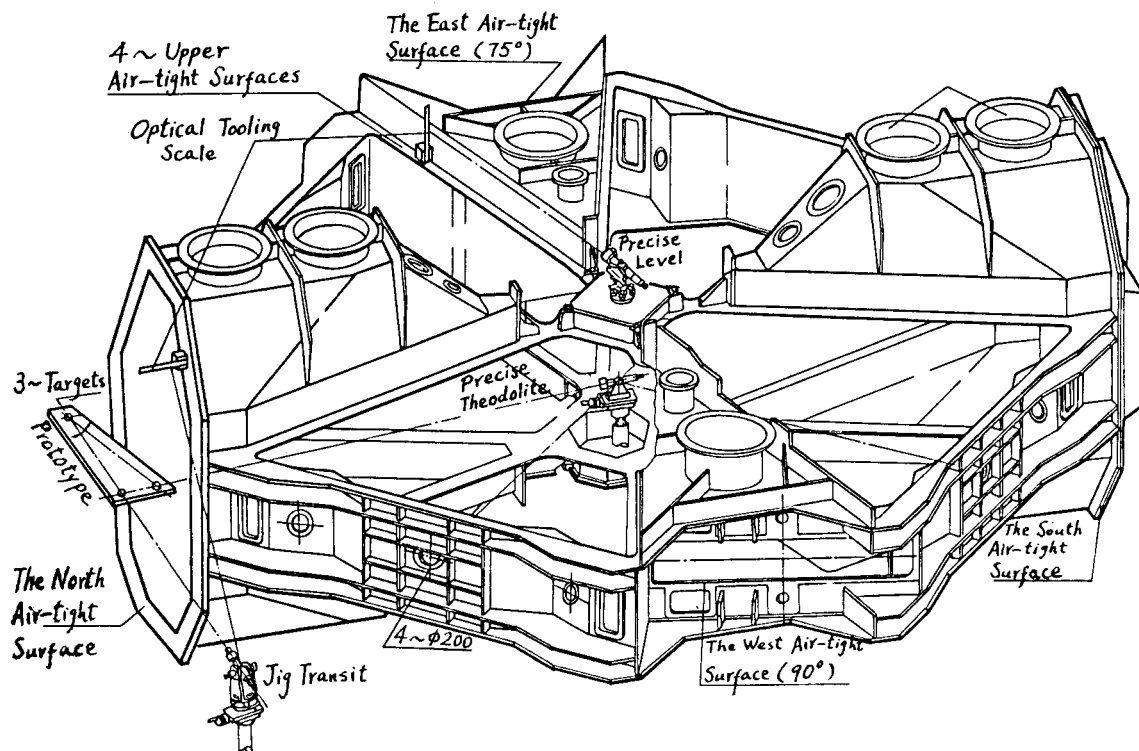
Measurement of the Air-tight Surfaces of Vacuum Chamber
